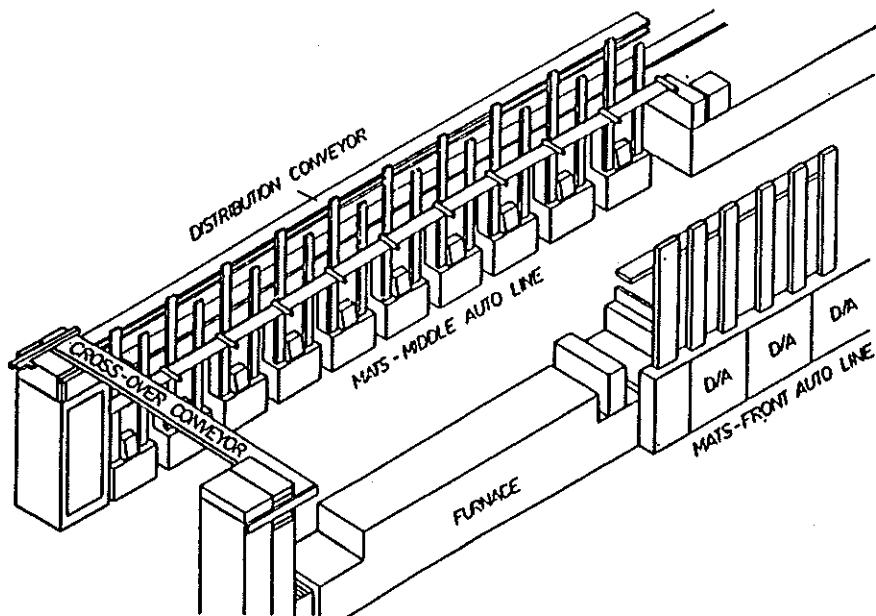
Schematic diagram showing the layout of the completed auto line.
